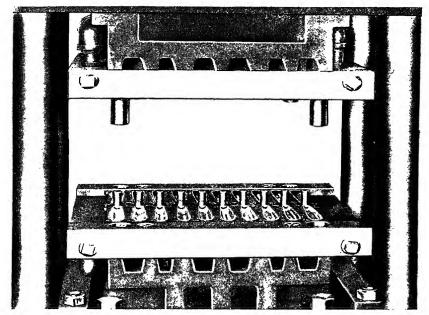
Twenty-cavity flash mold. The vertical pin standing between each pair of cavities carries a small horizontal pin for forming a hole in the work. The vertical pins are used as ejectors, lifting the molded parts from the lower dies, on the horizontal pins.
